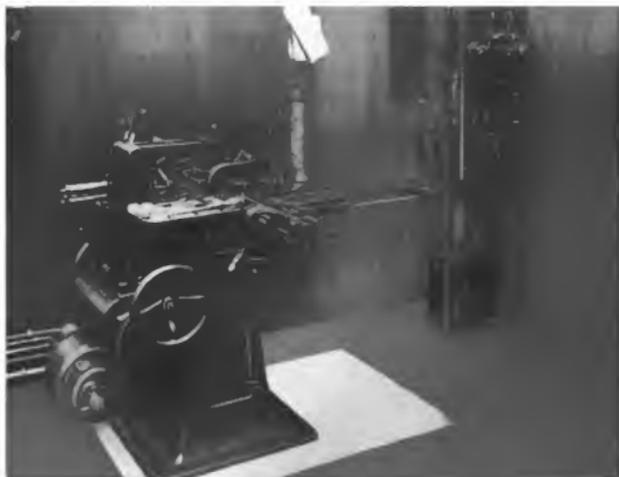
Mercury Arc Rectifier and Motor Driven Monotype Machine, Norwood Press, Norwood, Mass.
